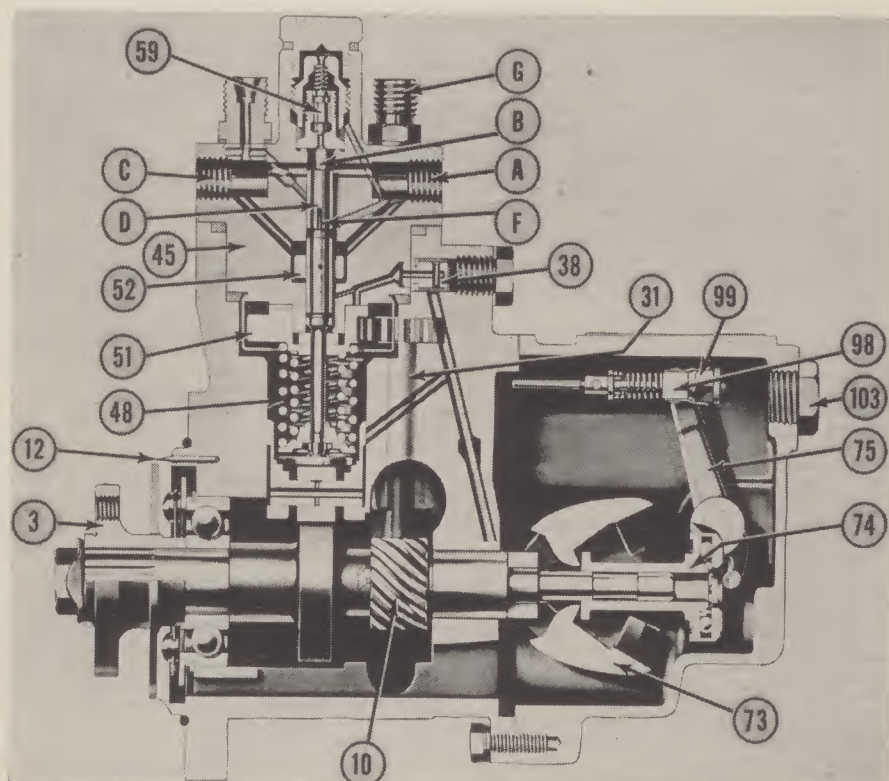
Phantom view of latest version Bosch PSB type injection pump is identified by the round cornered (instead of square) hydraulic head (45). Refer to Fig. 0486 for parts legend.
